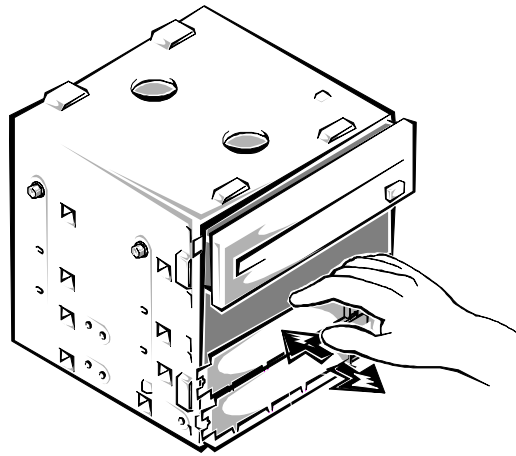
Removing a 3.5-Inch Drive Bay Plate
